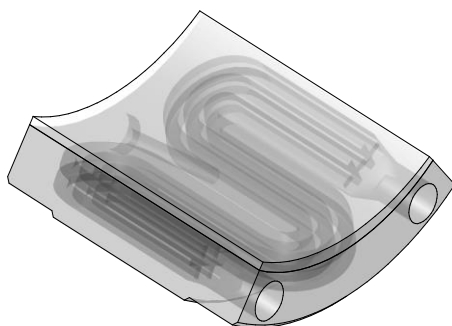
Six-squares cross-section cooling circuit inside the bearing pad.
